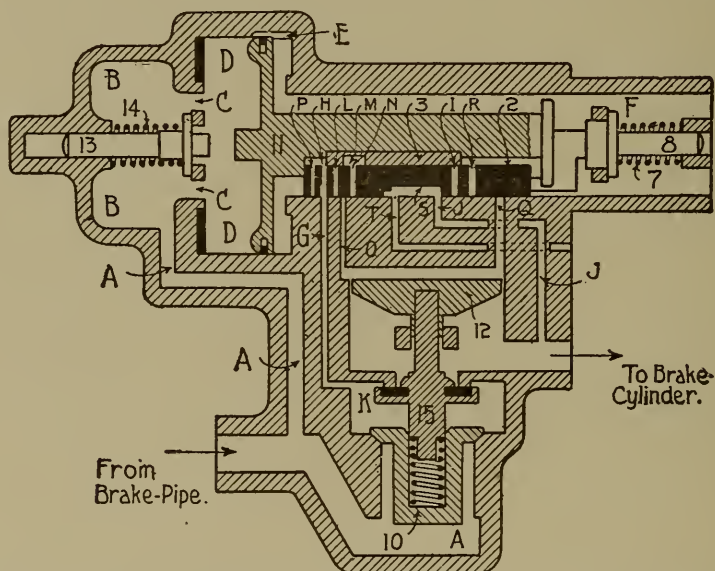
"K" Triple Valve in Full-Release and Charging Position.
